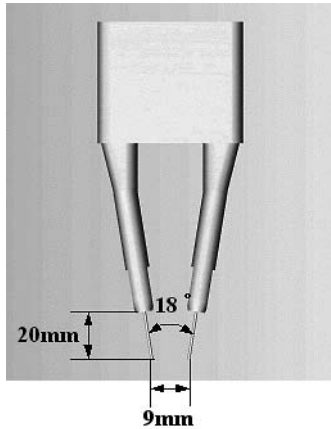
Tandem pulsed GMA welding torch configuration
